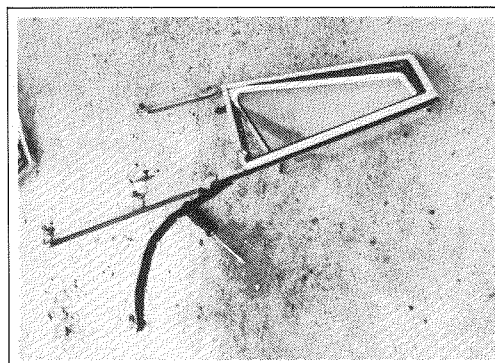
Slightly out of sequence but none the less useful, if your window channel fabric is rotten, replacement is quite simple but for obvious reasons has to be done with the quarterlight assembly off the car. Start by grinding off the heads of the securing pop rivets and prise out the old channel. Push in and resecure a new one.
